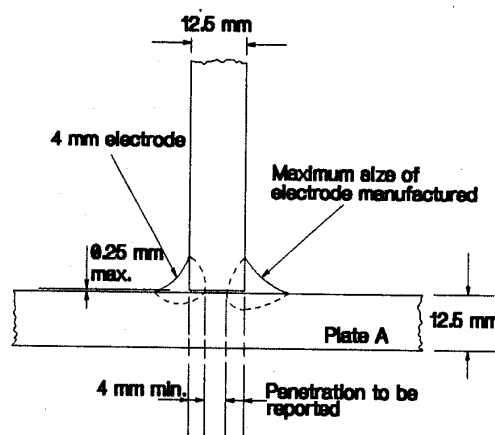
Deep penetration fillet weld test assembly
